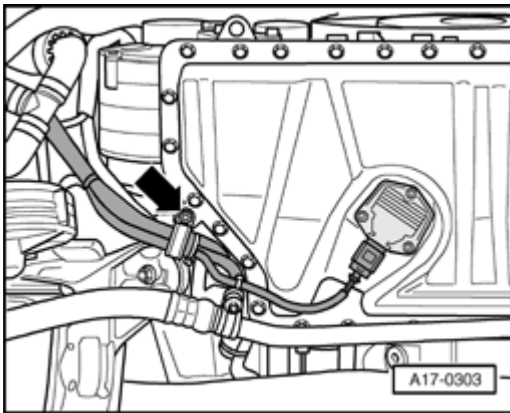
Removing Guide On Lower Section Of Oil Pan
